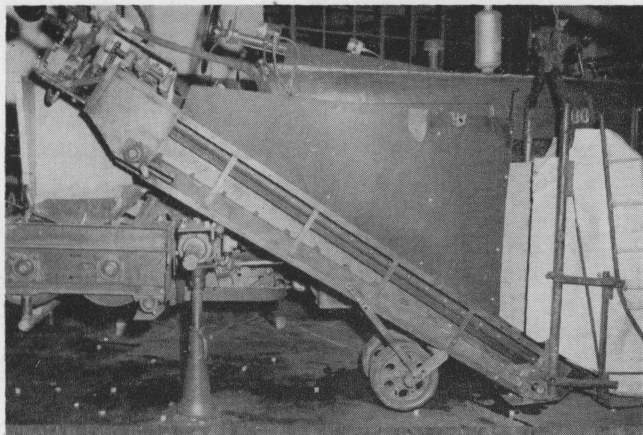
Stripper unit and crusher rolls used on machine 4, Table 15.
